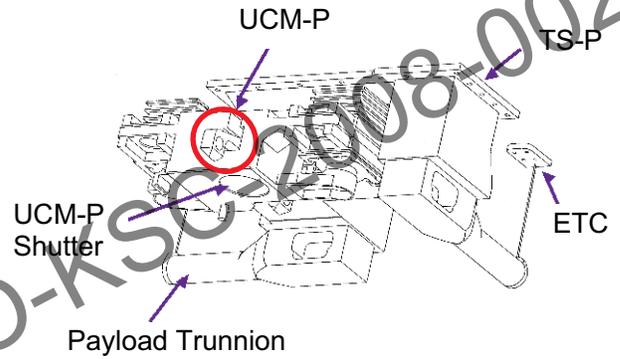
Physical Interface Check between ELM-ES Scuff plate and Assembly / Inspection Stand
